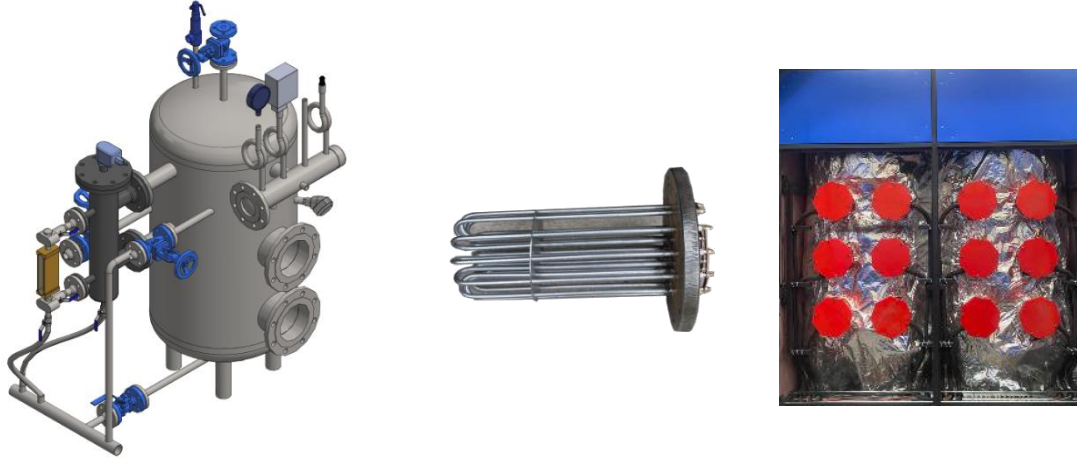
Boiler Heater Connection Flanges and A Sample Heater Photo
